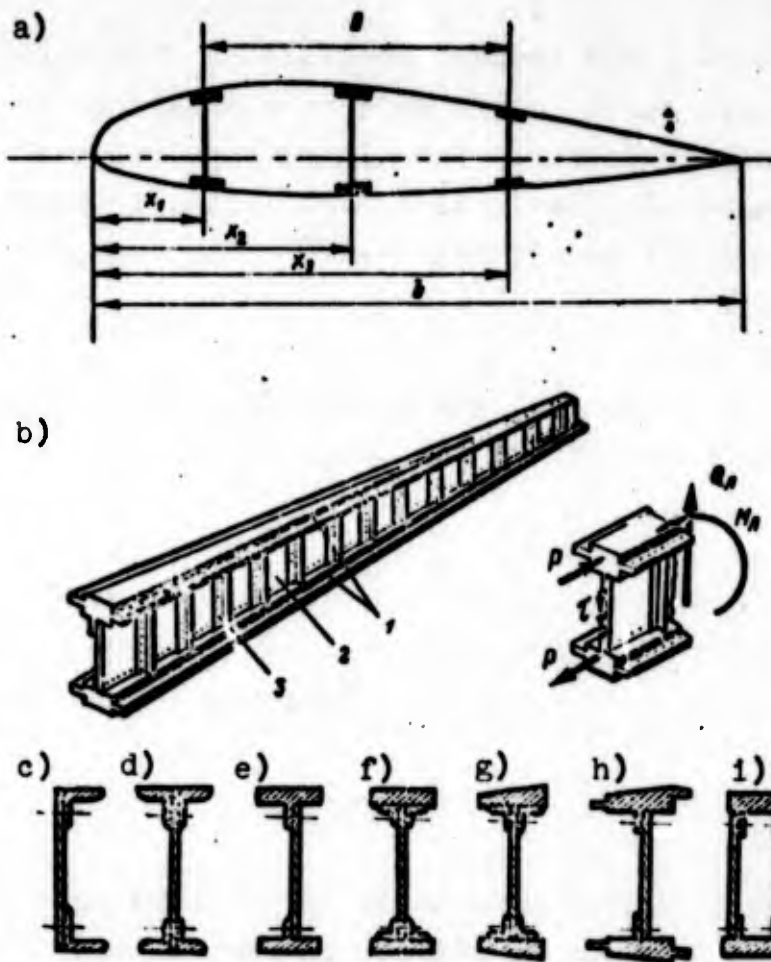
Beam spars: a) the arrangement of the spars along the wing chord; b) spar of H-shaped cross section and the operation of its elements; c-i) beam spars cross sections; 1 - flanges; 2 - web; 3 - strut.
